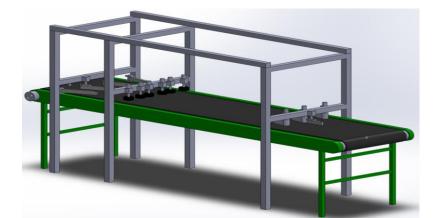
Preliminary Design and Mechanical Mechanism and Drawing Some issues here include the fact that there needs to be motors for all the wheels, the wheels must be enough to space pieces out well, which is a challenge with irregular sized pieces. The moving arms must also be small but powerful enough to swipe pieces side to side, but accurately so that there is no overlap between rows. Also, guiders, moving arms, and wheels must be placed a distance above the conveyor to prevent rubbing against the belt, which can affect belt speed with drag. It is challenging to have only three rows of throughput and a large speed to efficiently sort all the specimens with this design.
